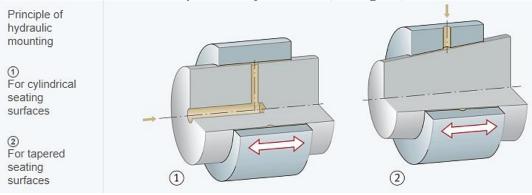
MECHANICS OF HYDRAULIC REMOVAL
